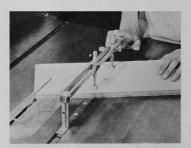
Using a clamp attachment to cut an angle. The guard can be used for this operation.
